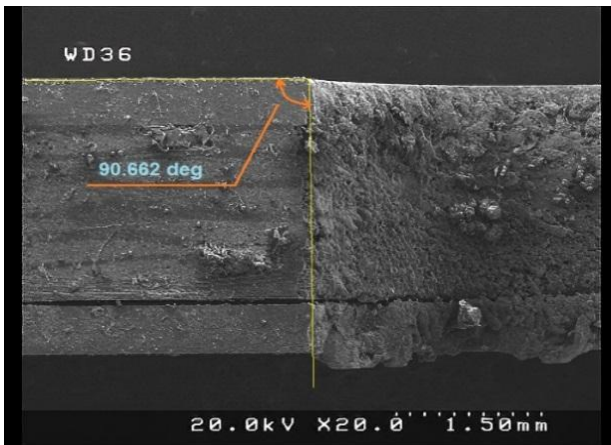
the left side of the cross-section of a hole cut at a power of 2.5 kW, with an assist gas pressure of 6 bar and a feed rate of 8600 mm/min.
